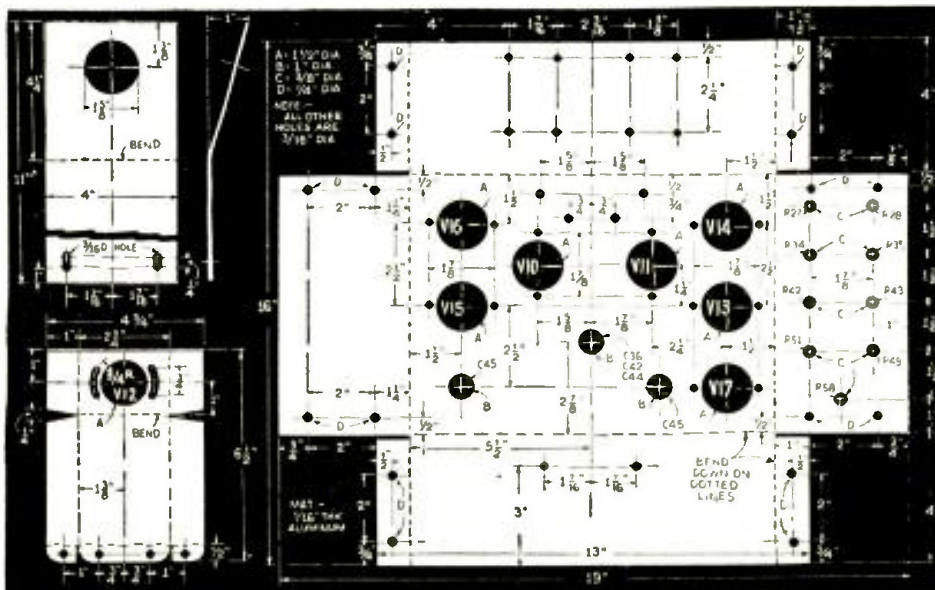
The forming and drilling layout of the chassis and tube supports.
